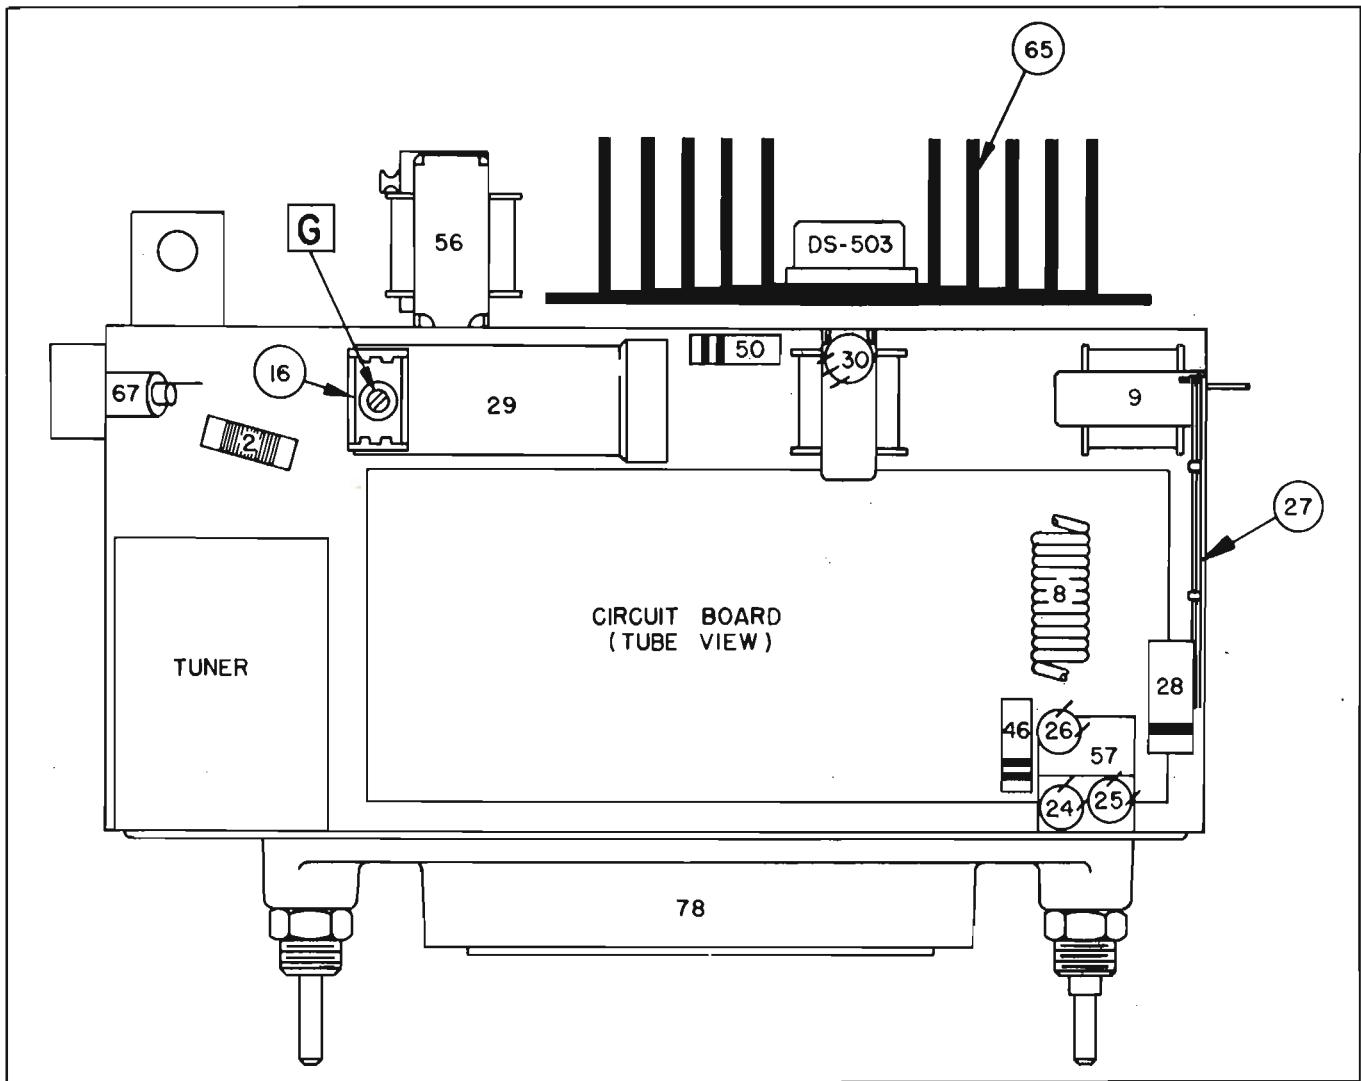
PARTS LAYOUT - BOTTOM VIEW - 988336 - RADIO
